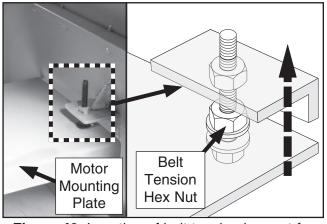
Location of belt tension hex nut for raising/lowering motor plate.
